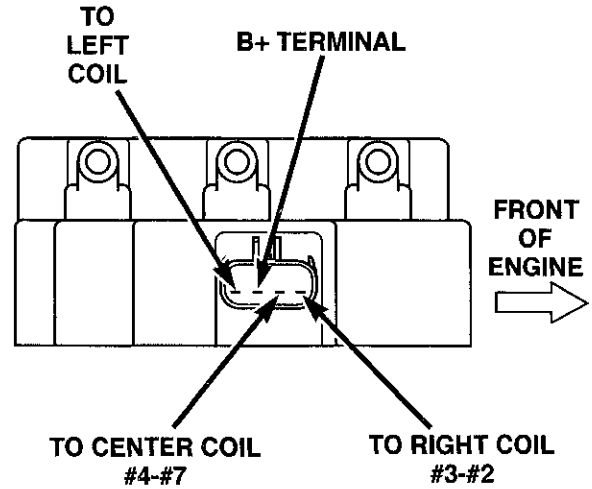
Checking Coil Primary Resistance—Front Coils—8.0L V-10 Engine
